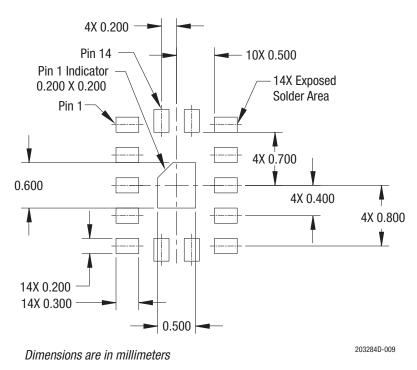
SKY13550-667LF PCB Layout Footprint (Top View)
